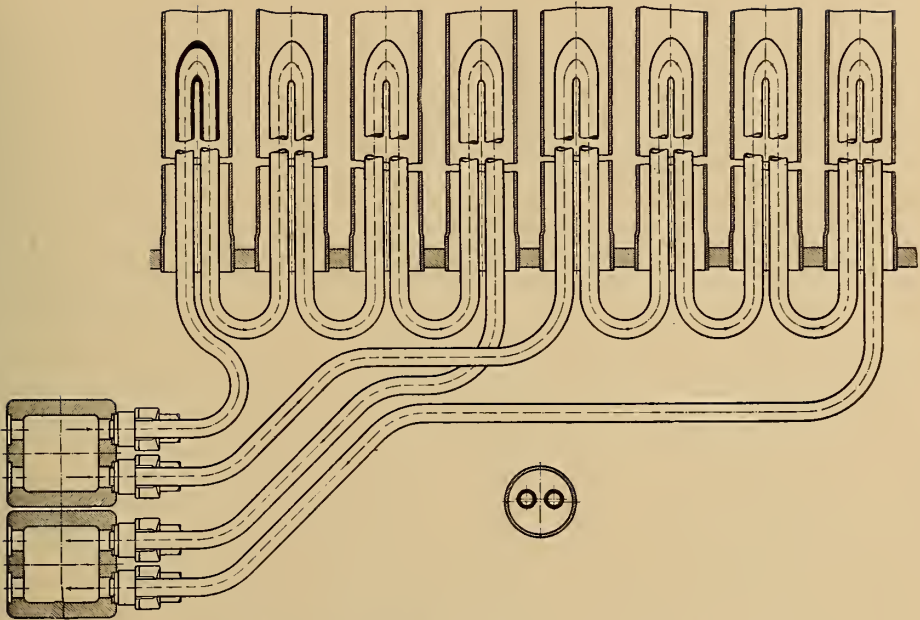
SCHMIDT SUPERHEATER AS APPLIED TO A FIRE-TUBE BOILER
